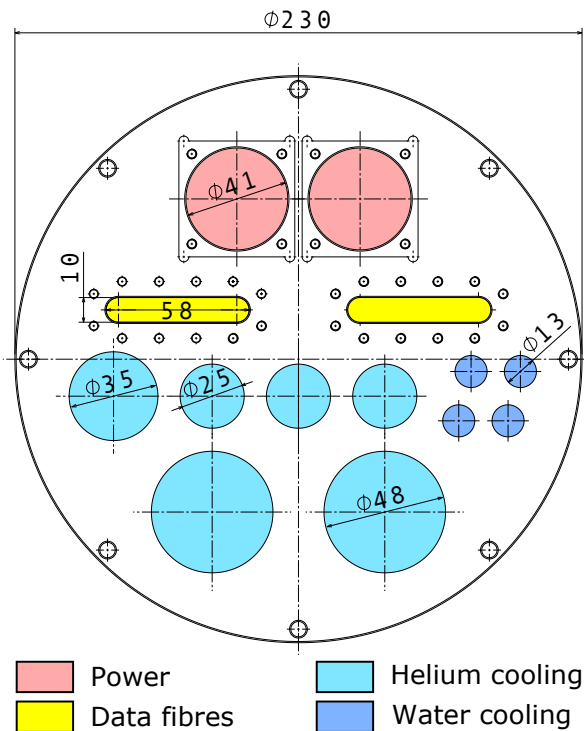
Drawing of the cabling flange. Additional ports will be added for auxiliary use. Dimensions in mm.
